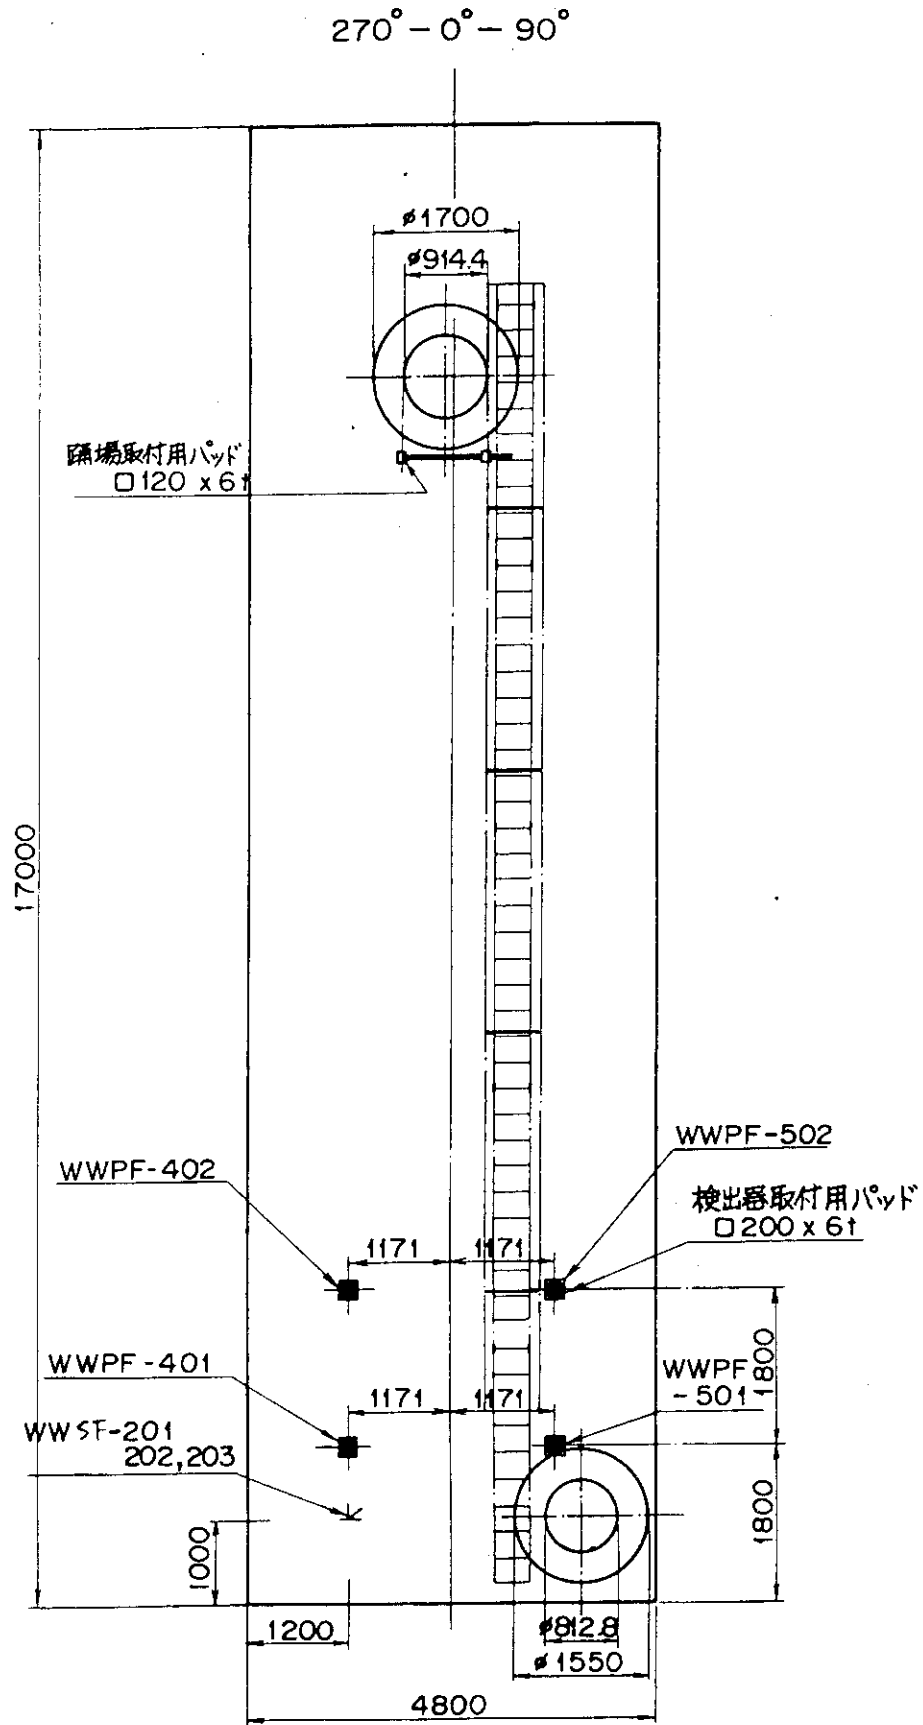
Locations of transducers on internal surface of large-shell (as of after addition)
